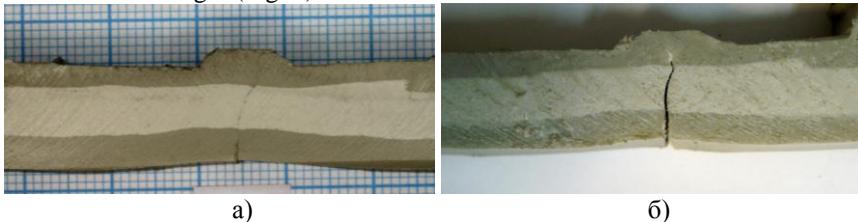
Cross-section of the specimen welded within the limited volume, with lack of fusion along the welding interface before (a) and after (b) tensile test.
